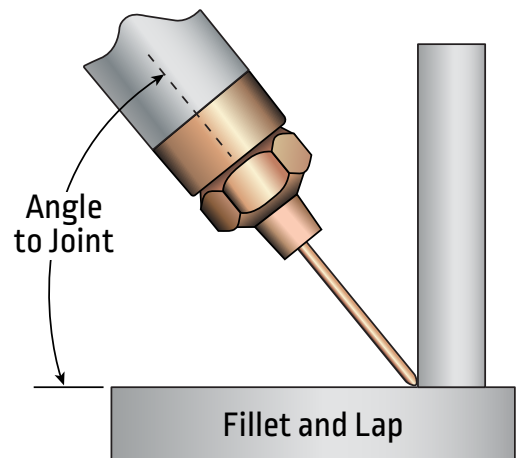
Electrode Angle to Joint—Horizontal Fillet and Lap Welds
